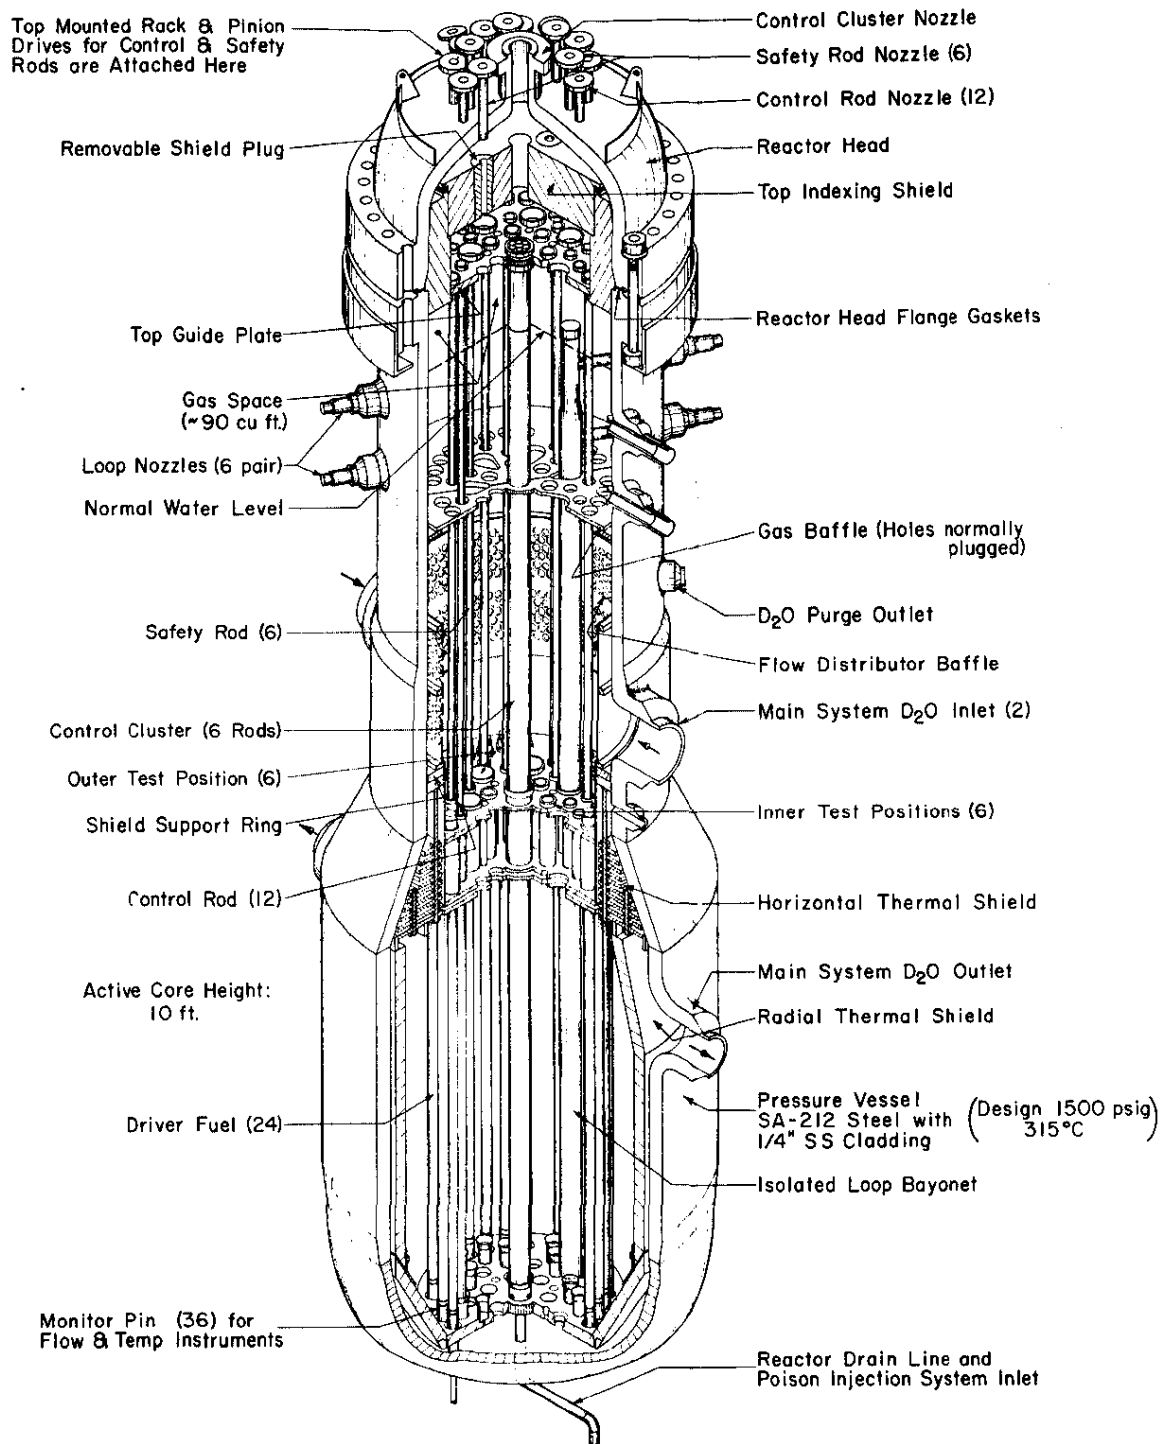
CROSS-SECTIONAL VIEW OF THE REACTOR VESSEL
